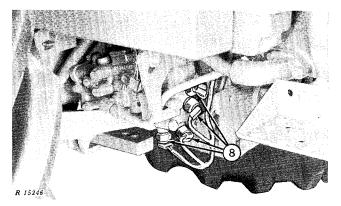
Power Front Wheel Drive Switches (Power Shift Tractor)
